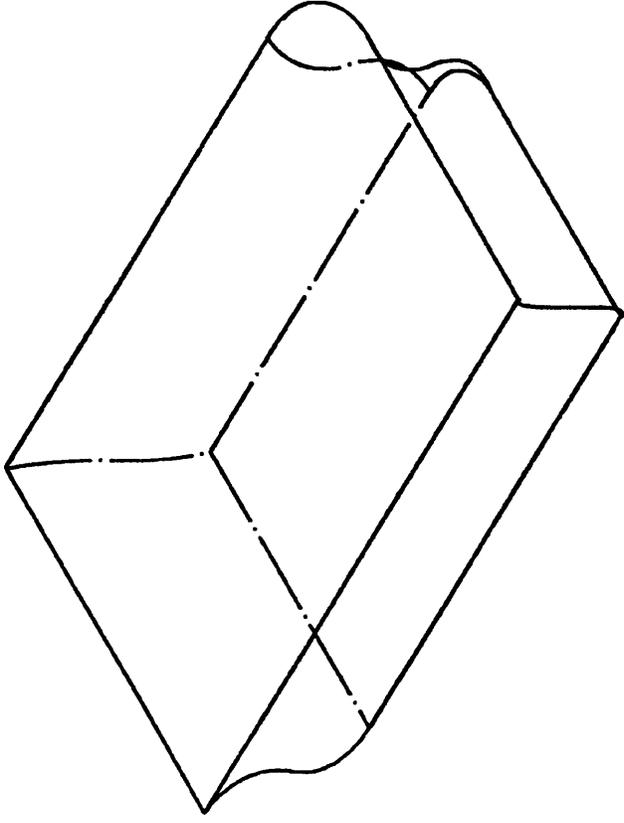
A typical 3D pocket which can be machined with Personal Machinist
